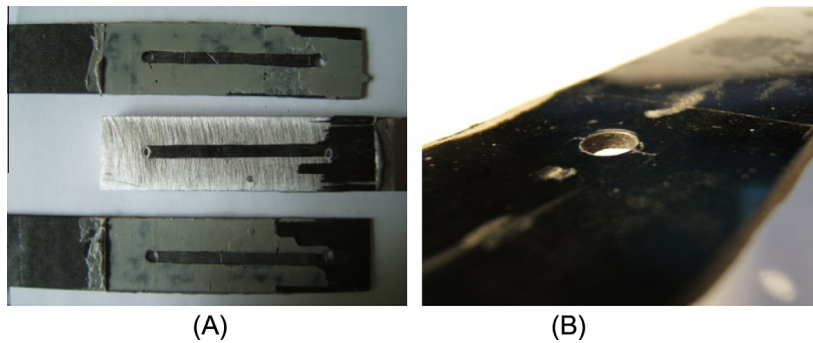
(A) Damaged surface of the hybrid specimens with aluminum rivets and (B) absence of damage of the CFRP composite laminate, near the hole.
